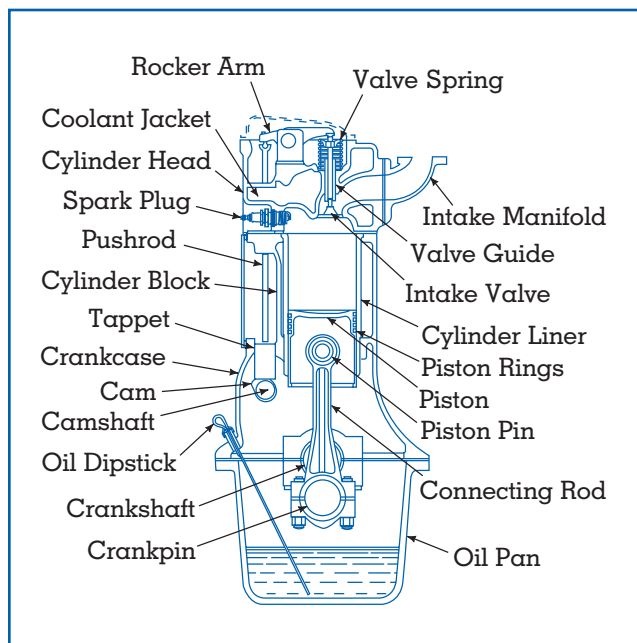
Cross section through gasoline engine using push-rod valve actuation.
